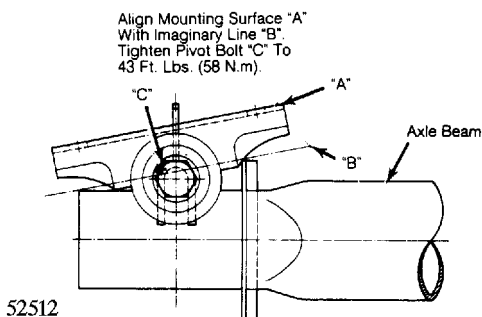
Correct Alignment of Axle Beam Mounting Pad
